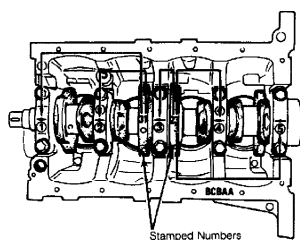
Locating Numerical Marks On Crankshaft Webs (SOHC)
